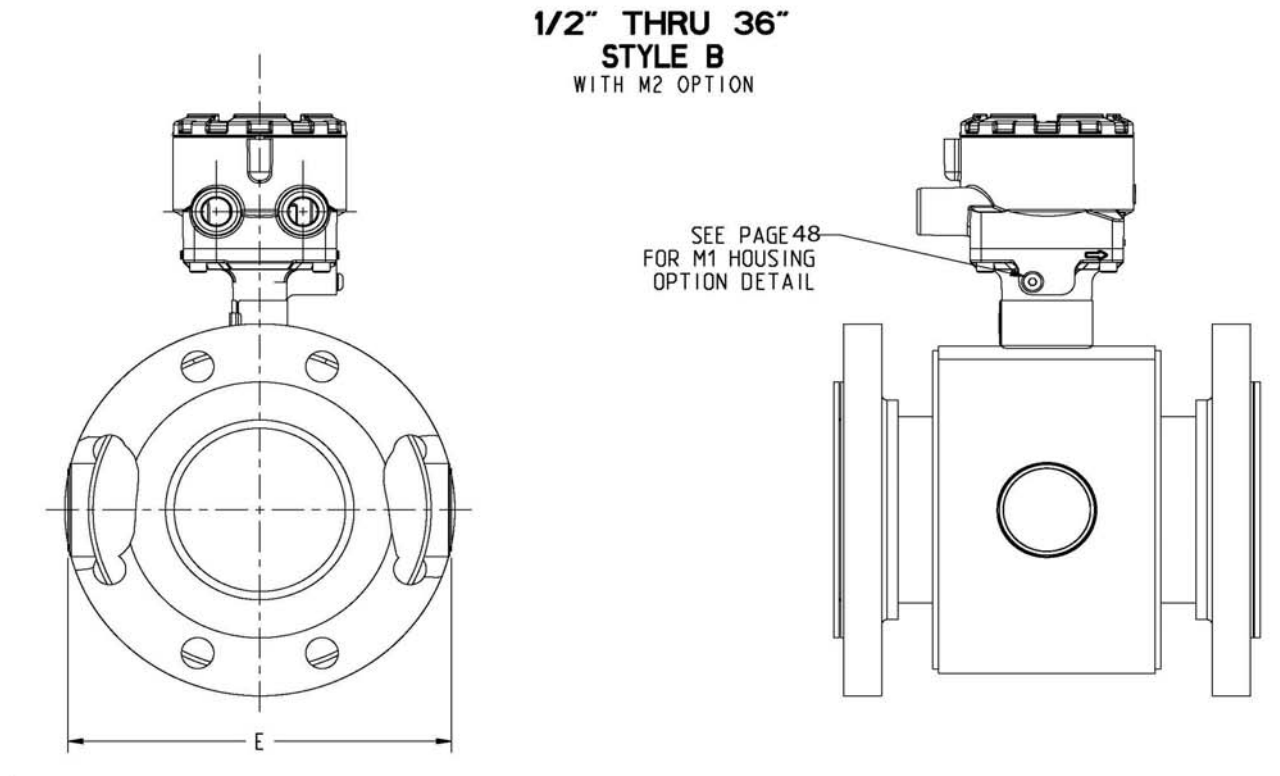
8705-M Flanged Sensor 1/2-in. to 36-in. (DN 15mm to 900mm) M2/M4 coil housing (P ≤ Class 600 derated)
